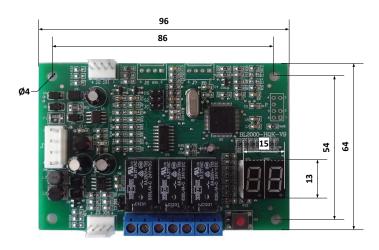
BL2000-HQK SHAPE & DIMENSION
